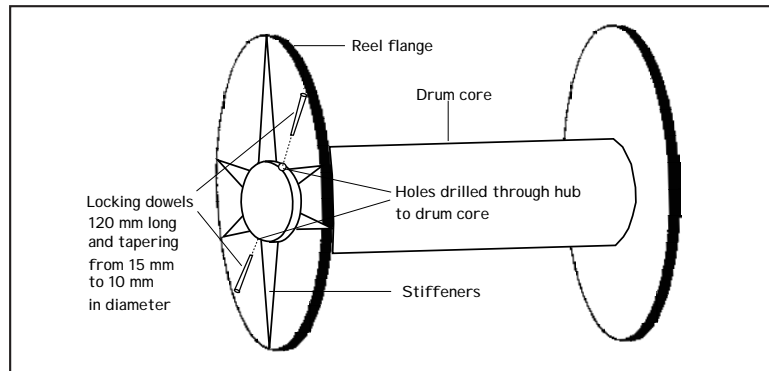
Tapered dowels used to lock the end flange onto the drum core after welding
